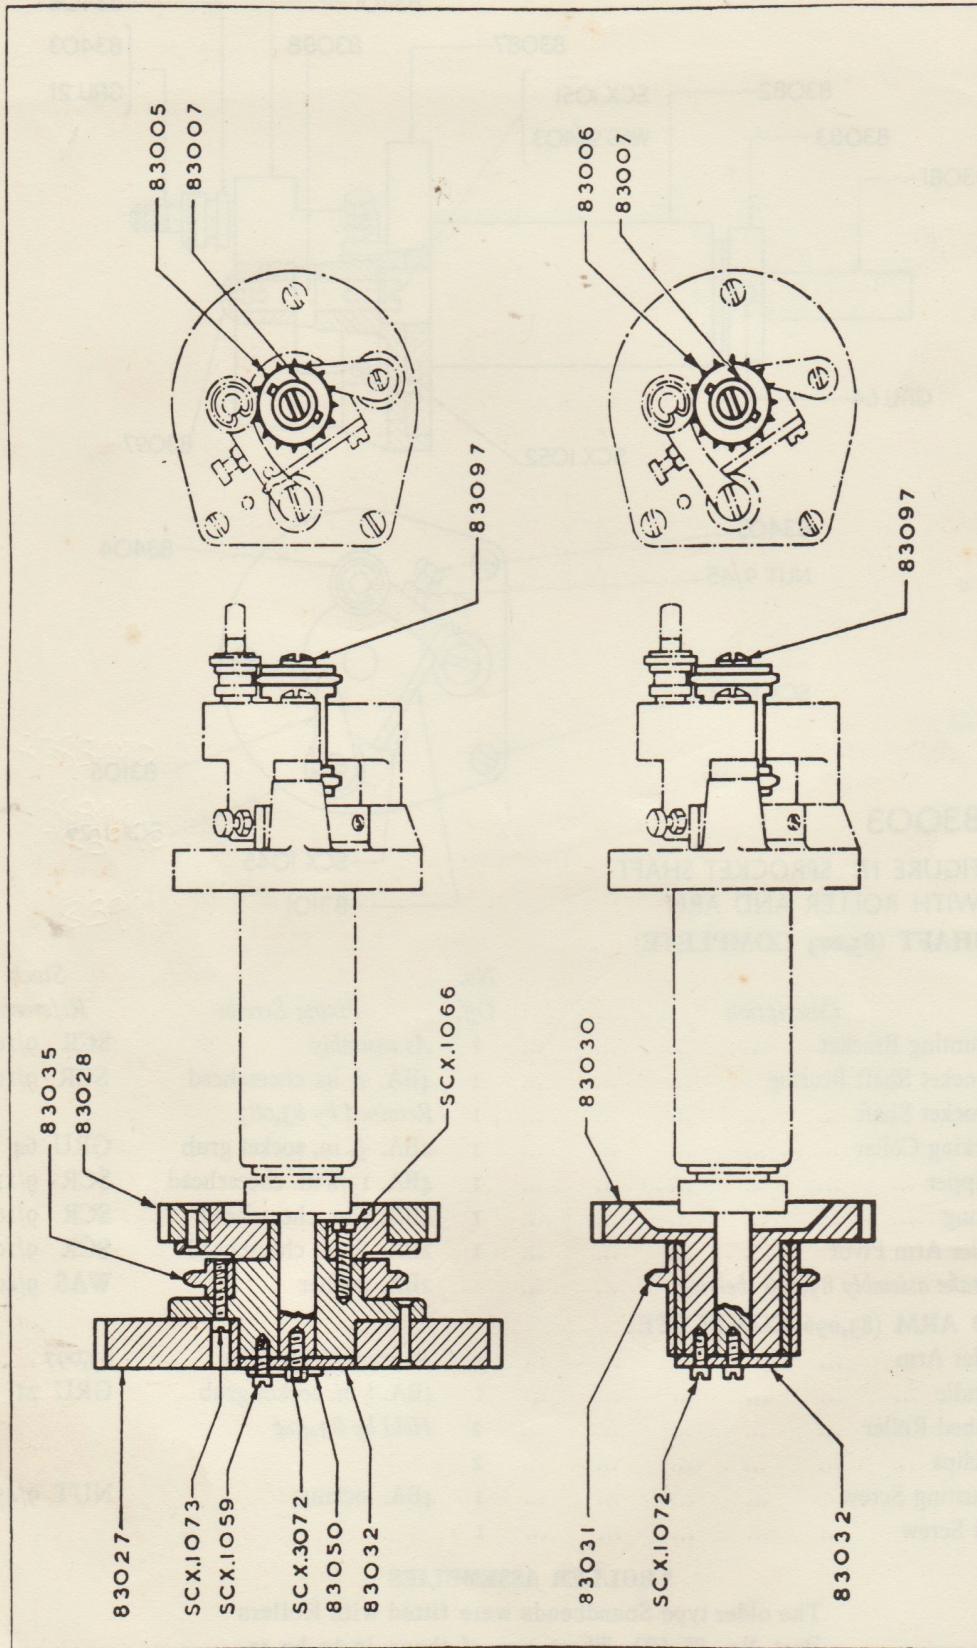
TOP AND BOTTOM SPROCKET GEARING, WITH SPROCKETS
